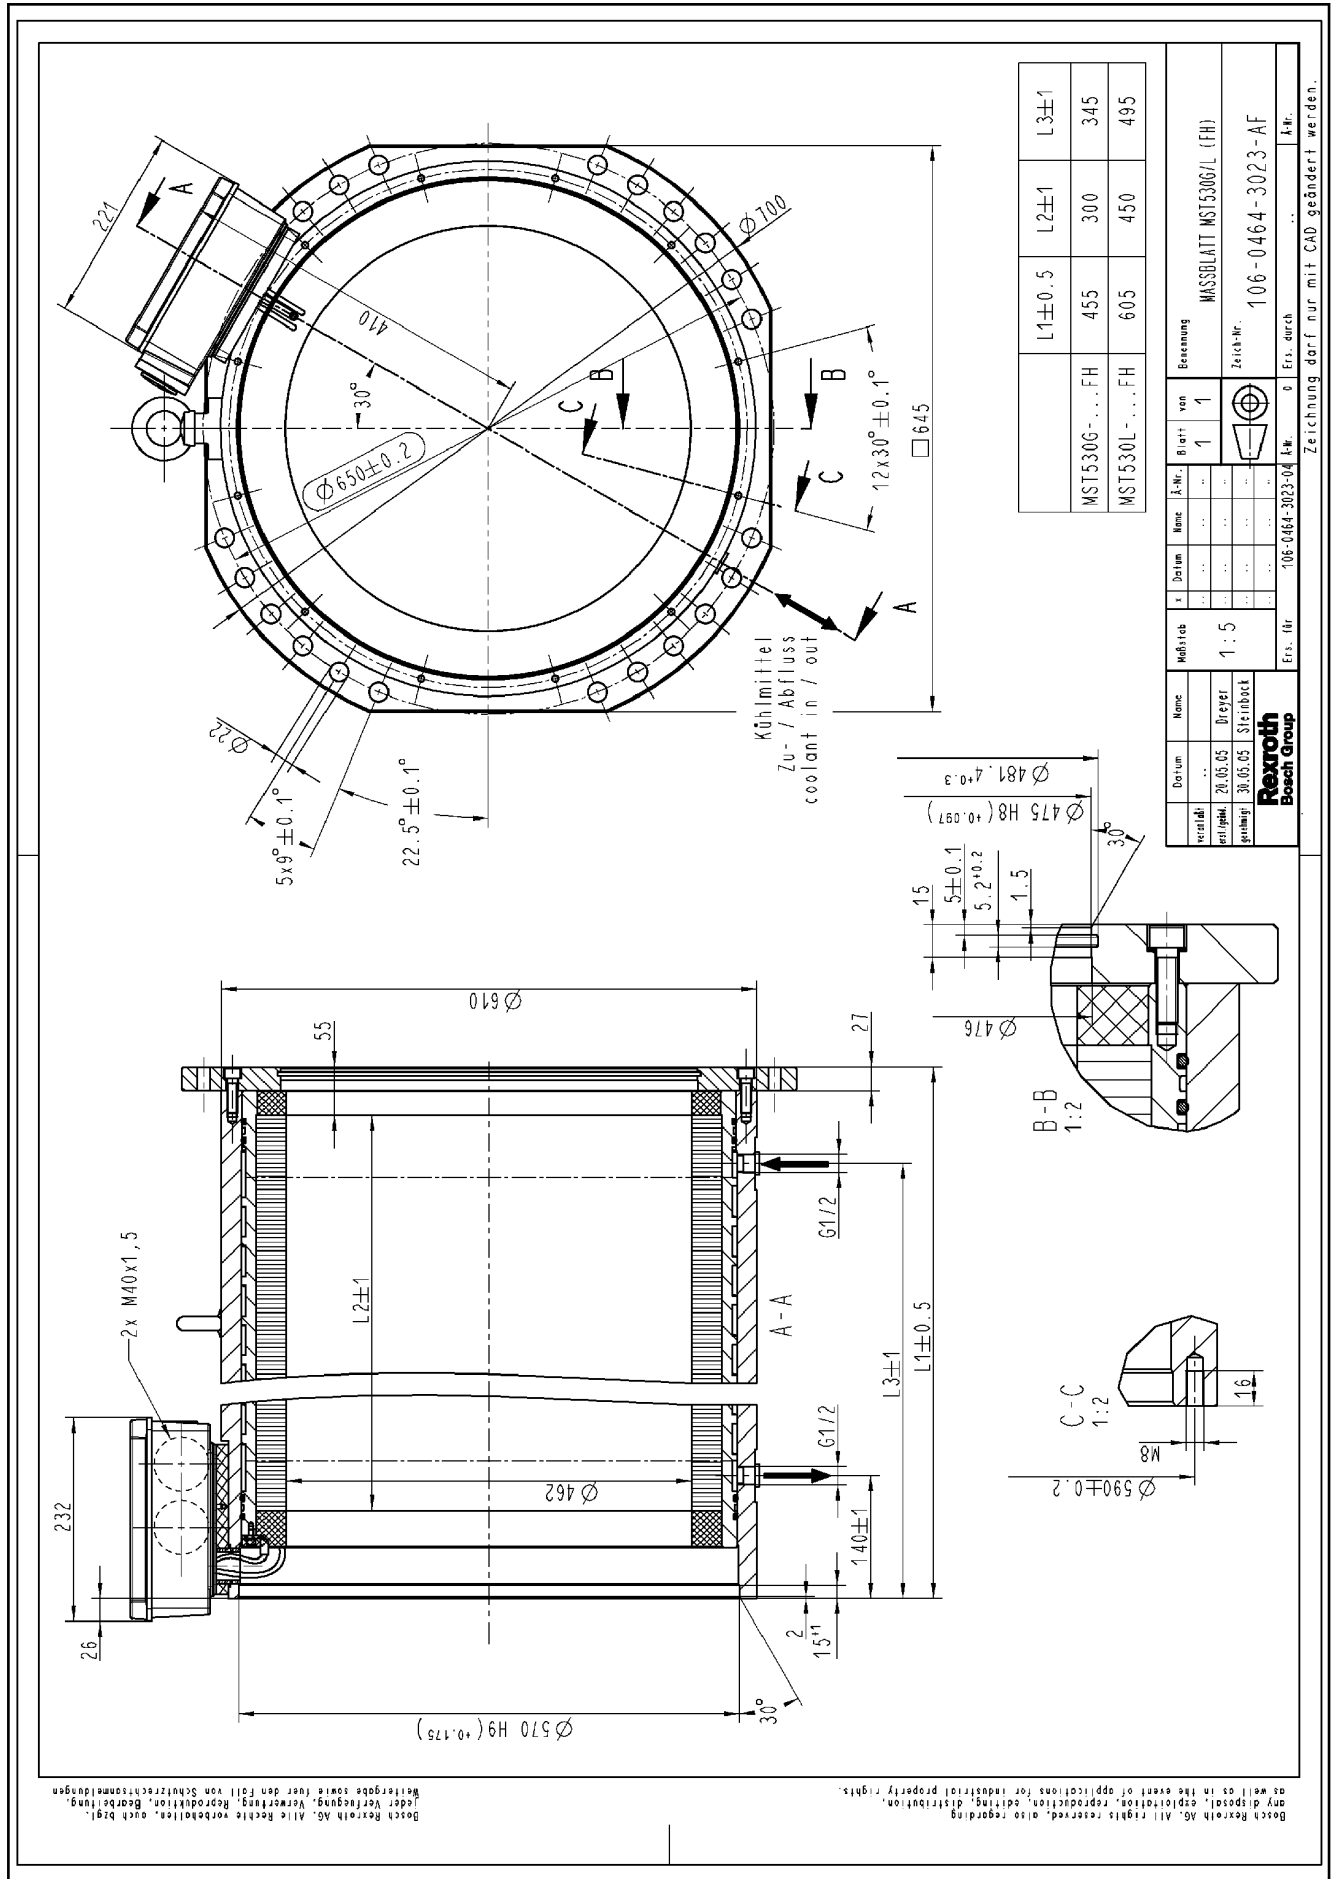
Dimension sheet for stator with housing - MST530G, MST530L
